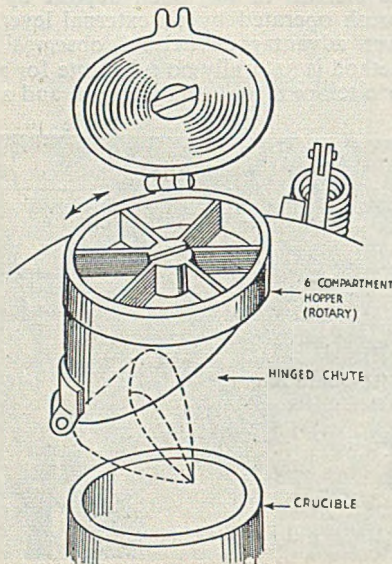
Sketch showing the Method of Making Successive Additions to the Charge Crucible.
